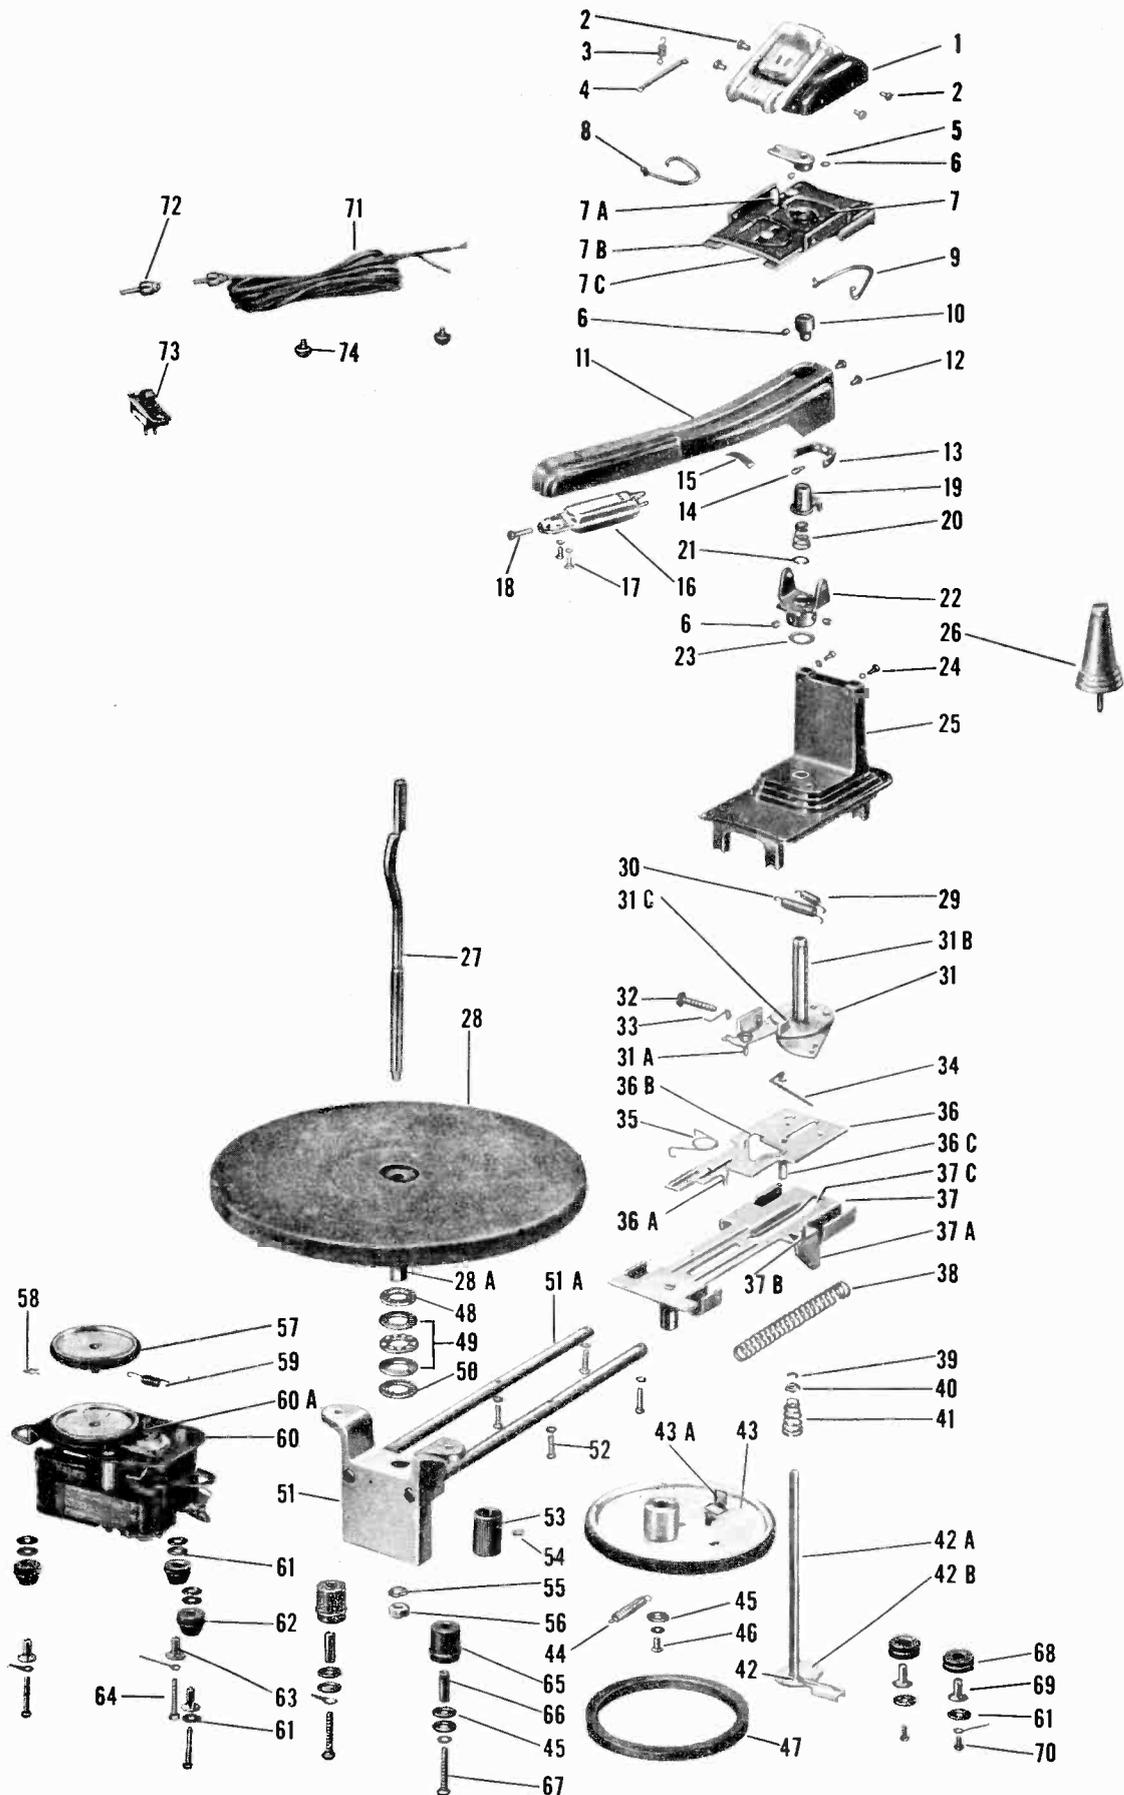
RECORD CHANGER, EXPLODED VIEW
